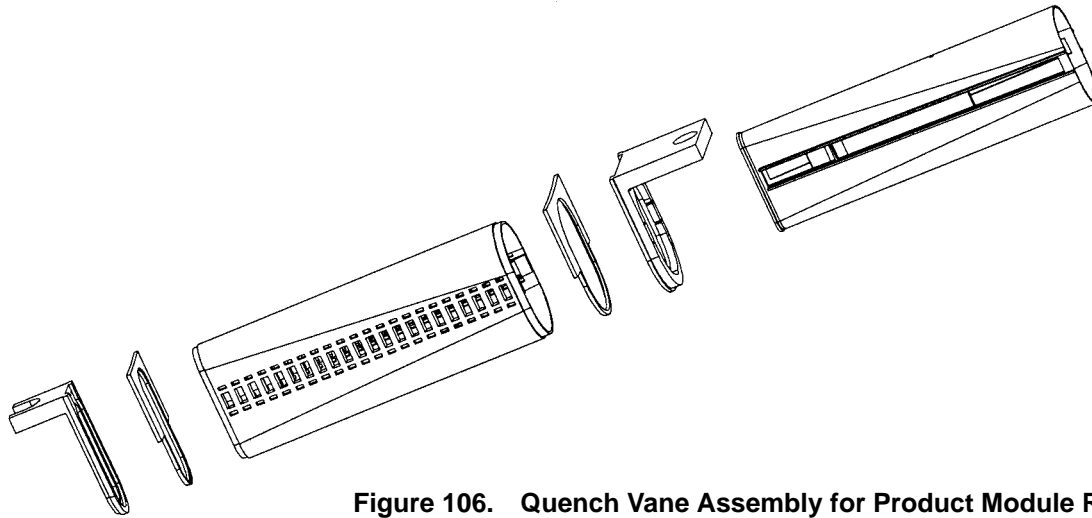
Quench Vane Assembly for Product Module Rig Build 1
